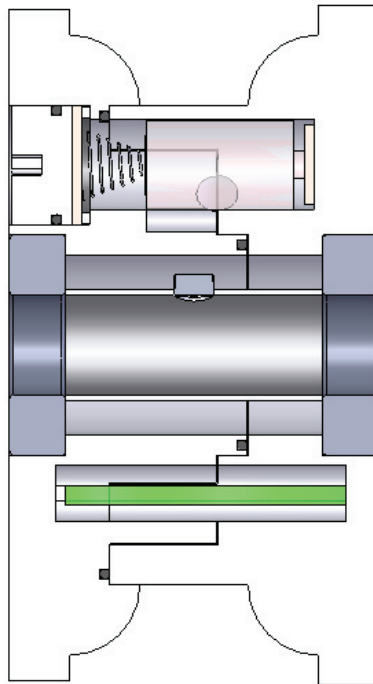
is a solid model of the CDL v2.0 showing the cross sectional view of the “flashlight” style battery holder.
